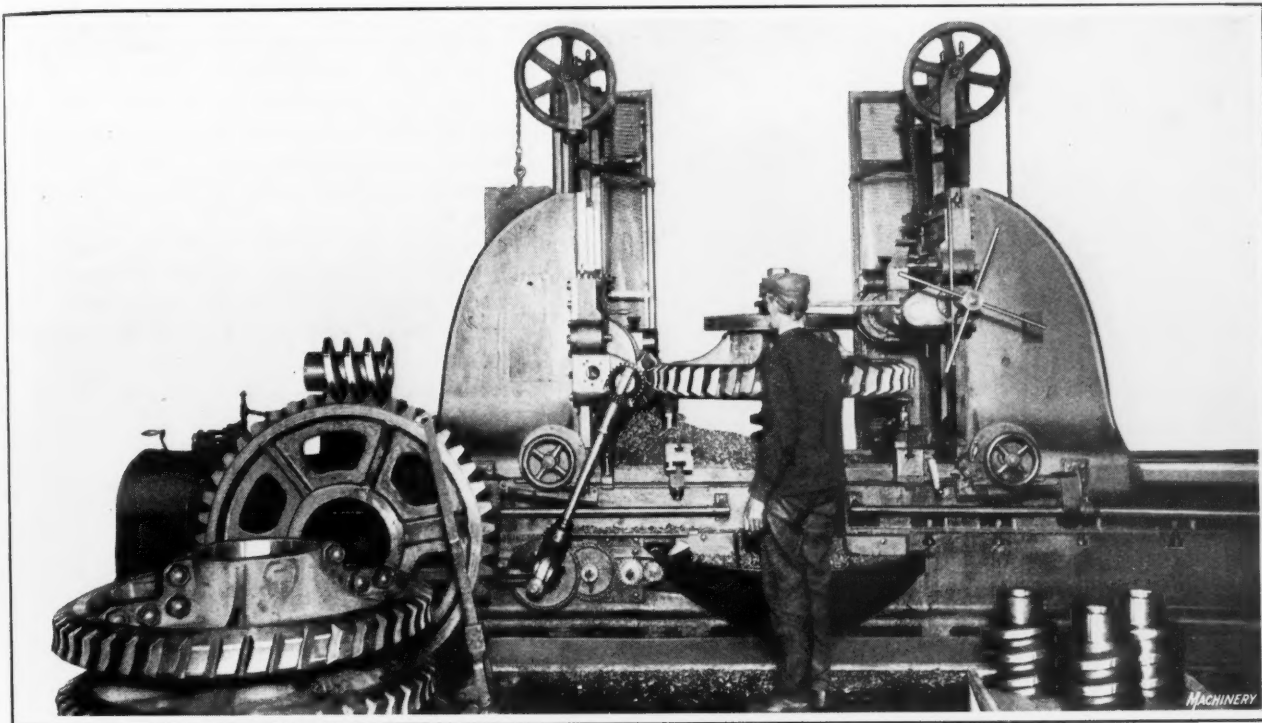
Duplex Type of Machine used for cutting both Spur and Worm Gears
